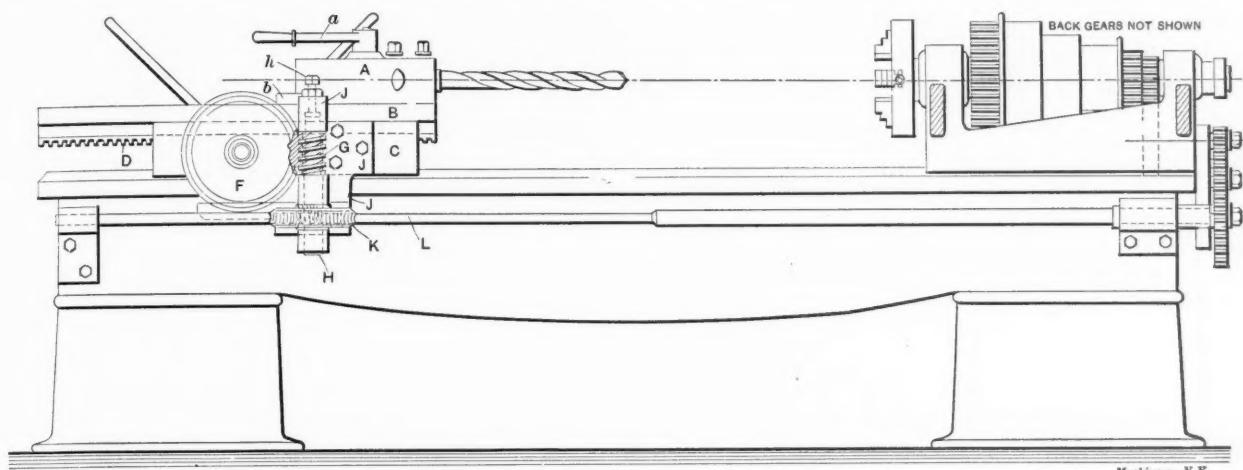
Heavy Boring Lathe, Rear Elevation, showing Worm Gear Feed Arrangement.
